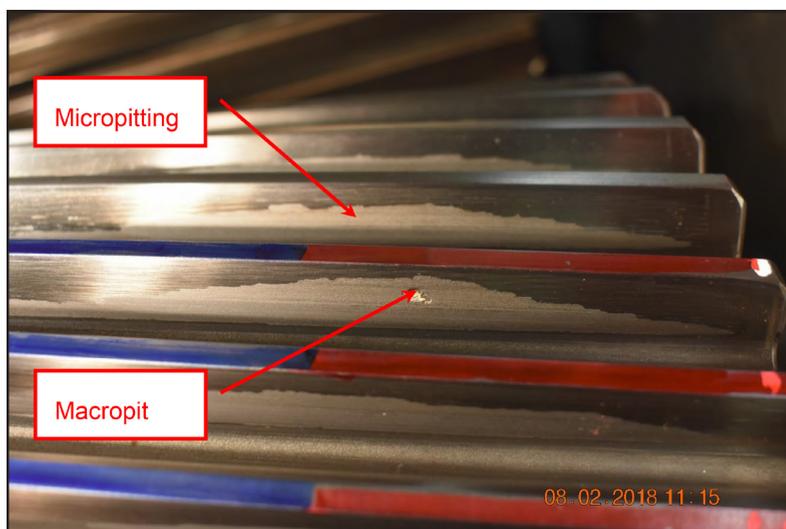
Close-up of micropitting, which begins 100 mm into the face and extends to 270 mm. There is a single macropit on one tooth. (Photo courtesy of Artec Machine Systems).
